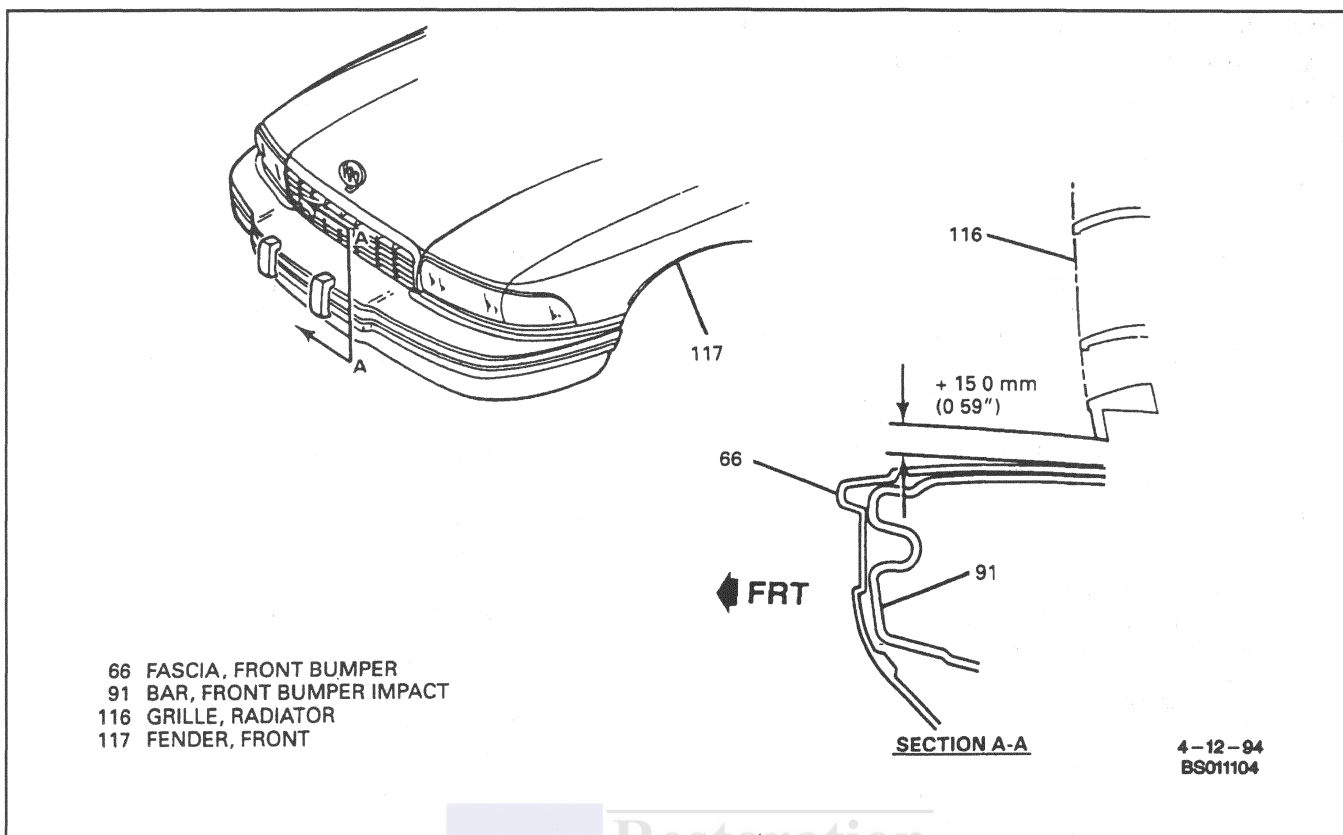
Front Bumper Alignment - (Buick Sedan)
